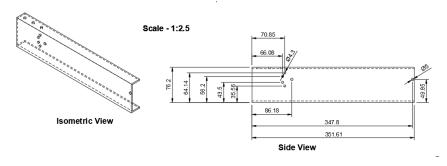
C-channel gantry arm with attachment points for ball screw and linear rail.
